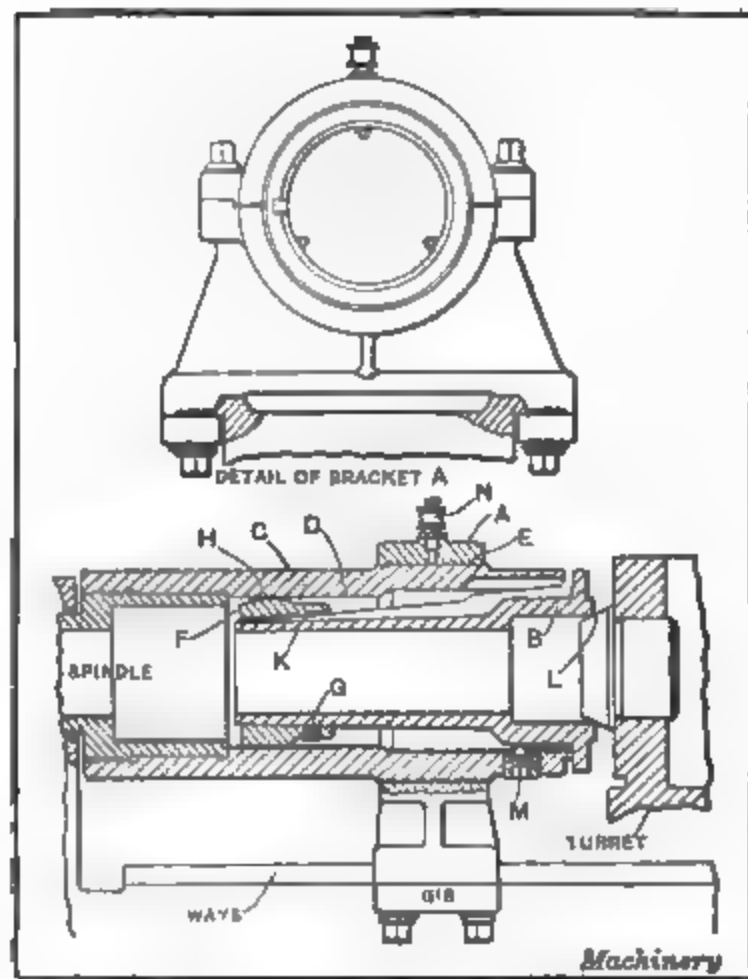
Fixture for holding a Long Part—Outer End is supported by Bracket
